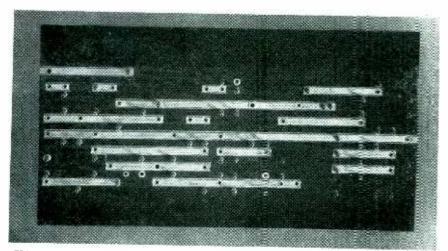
One side of a stamped wiring deck, with conductors cut, eyelets and pins installed. Either type of connection may be used between conductors on the two deck. Connections are made to a conductor on one side by punching place which misses metal on the back. Holes in eyelets and pins are used as terminals for component parts
